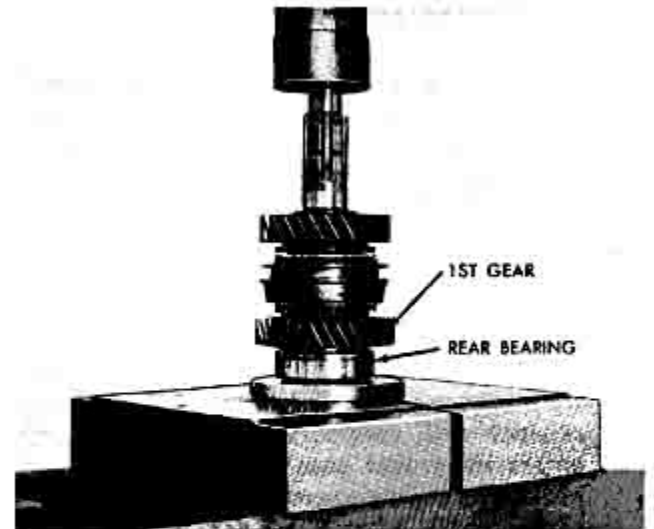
Installing 1st Speed Gear and Rear Bearing
